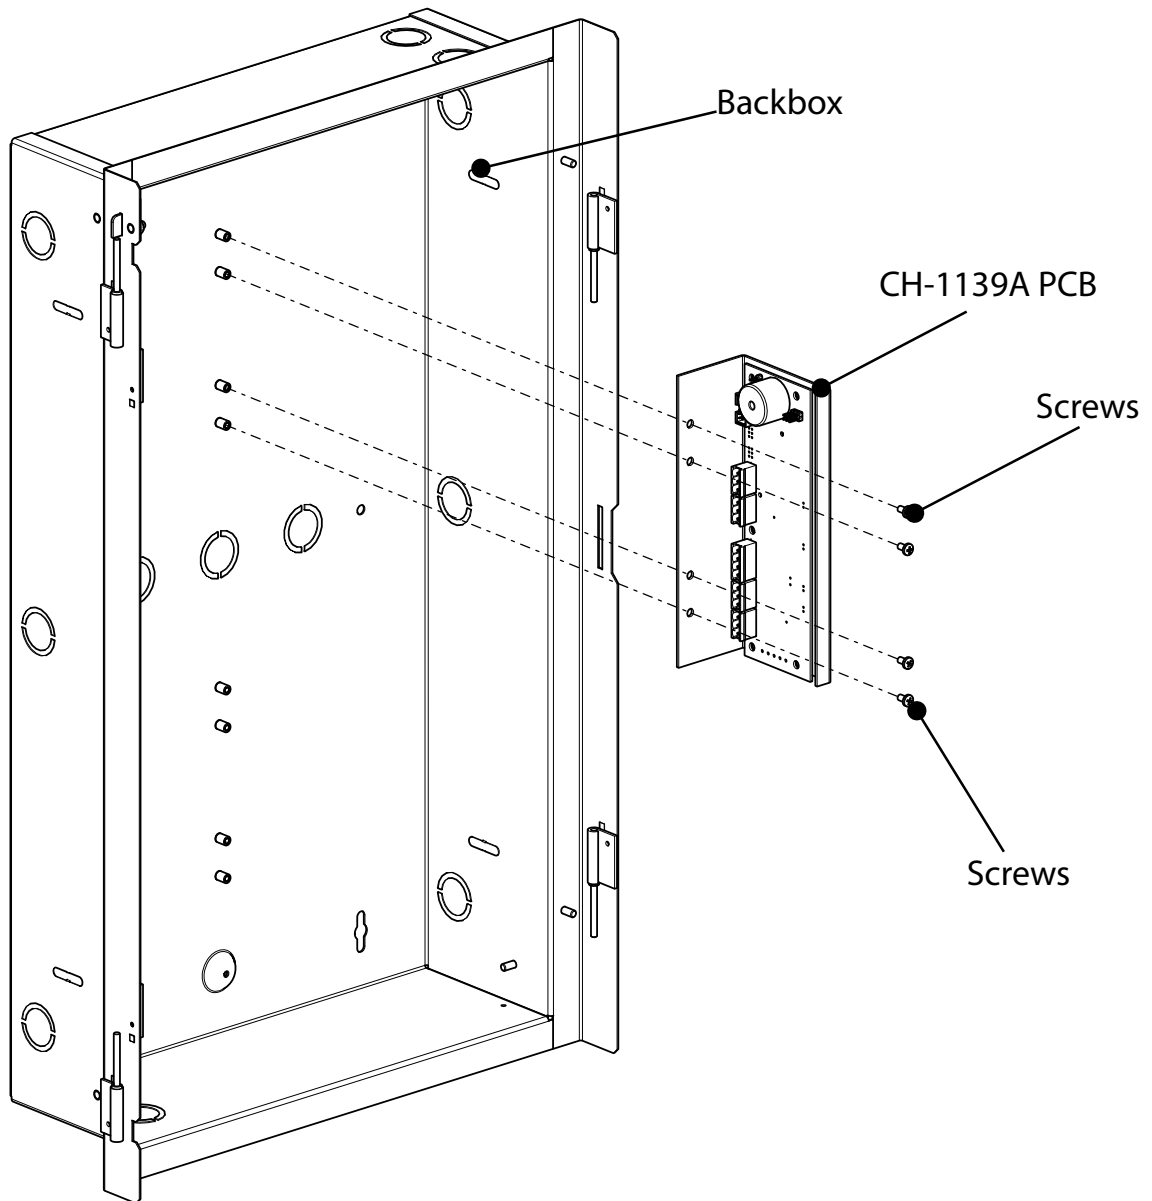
AUDMAX-RM mounting holes and knockouts
